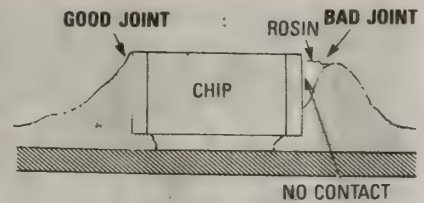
IF YOU FOLLOW THESE STEPS when soldering the chip components to the PC board, you'll have no problems with them.
